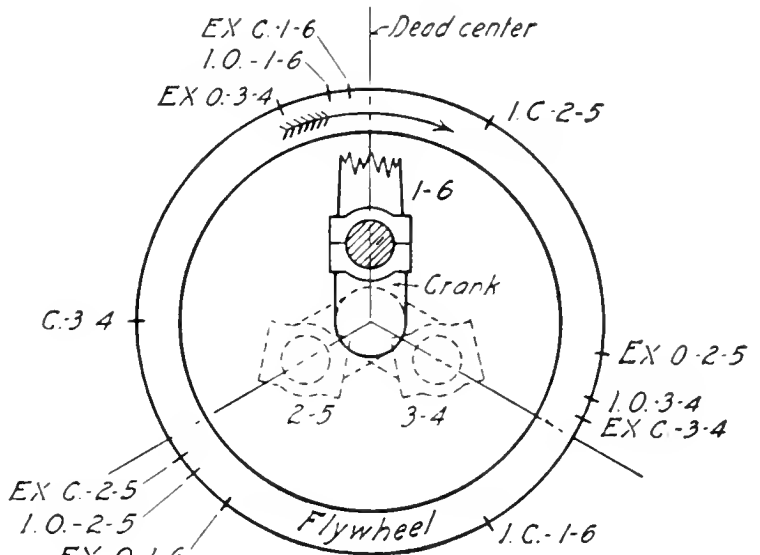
The flywheel markings as they would be found on a six-cylinder four-cycle automobile or tractor engine on dead center
